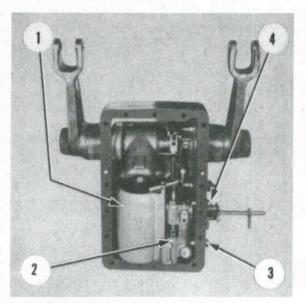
Underside view of hydraulic lift cover showing lift cylinder (1), control valve assembly (2) and oil pressure connecting sleeves (3 and 4).
